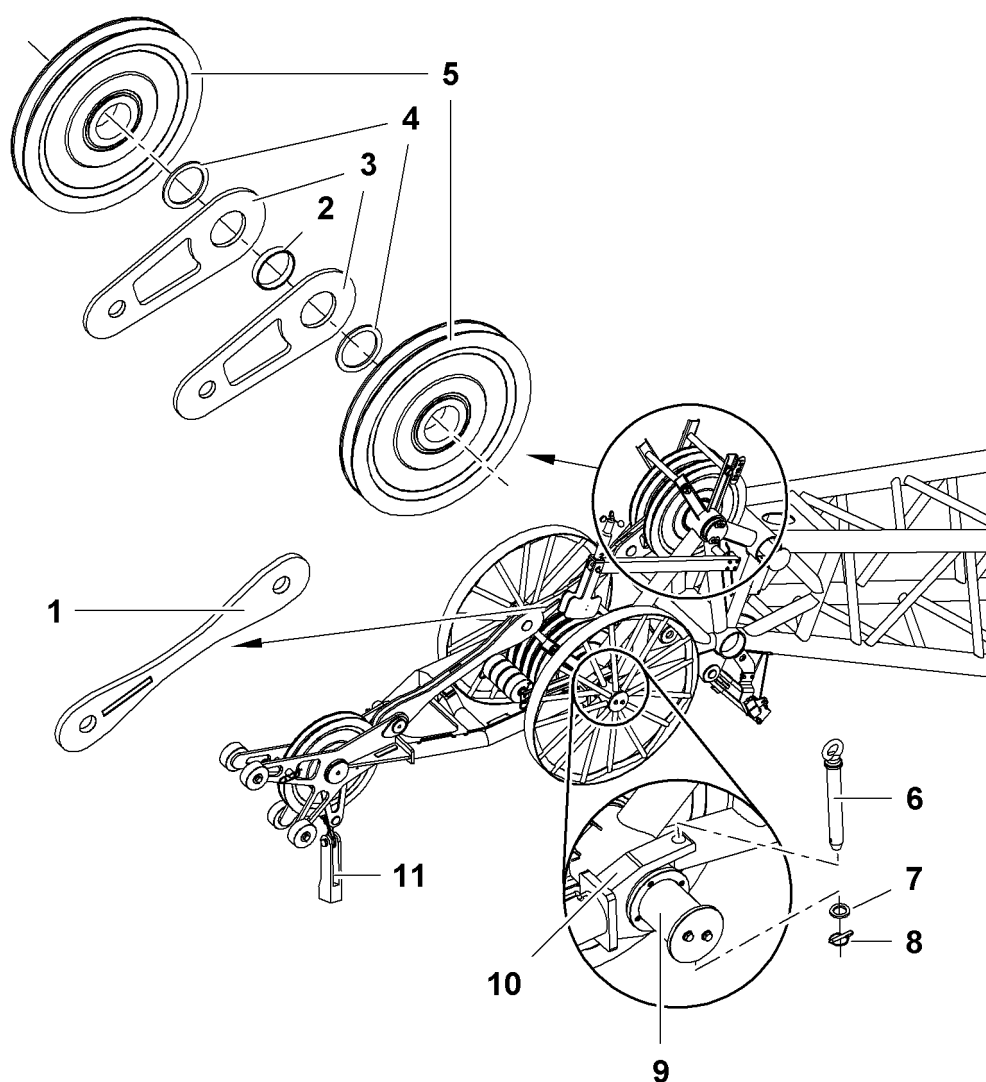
Attaching the auxiliary jib (66,000 lb) to jib head section 2316
